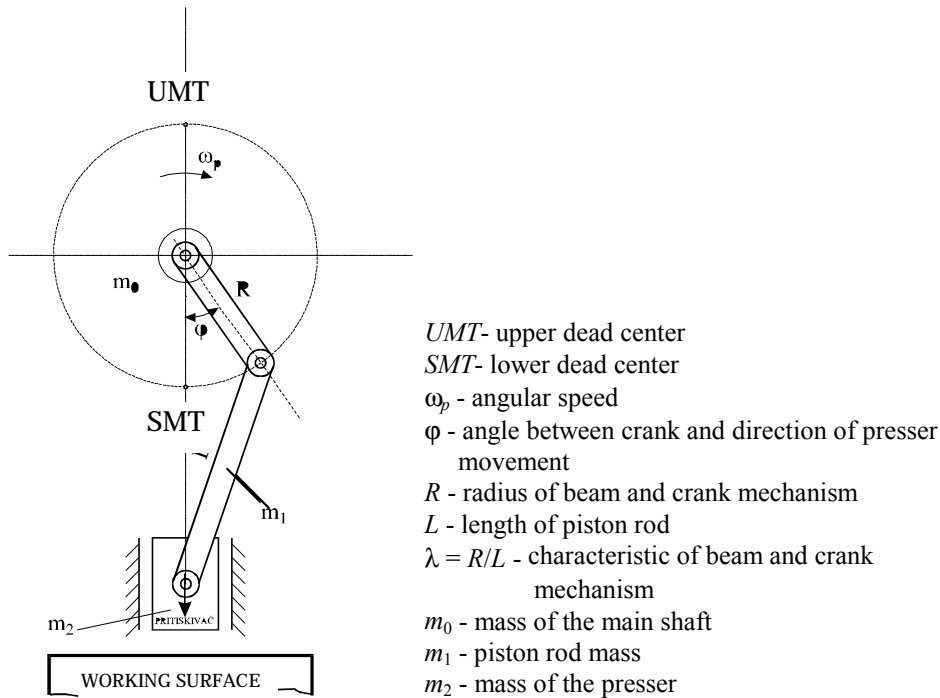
Scheme of beam and crank mechanism of eccentric press
